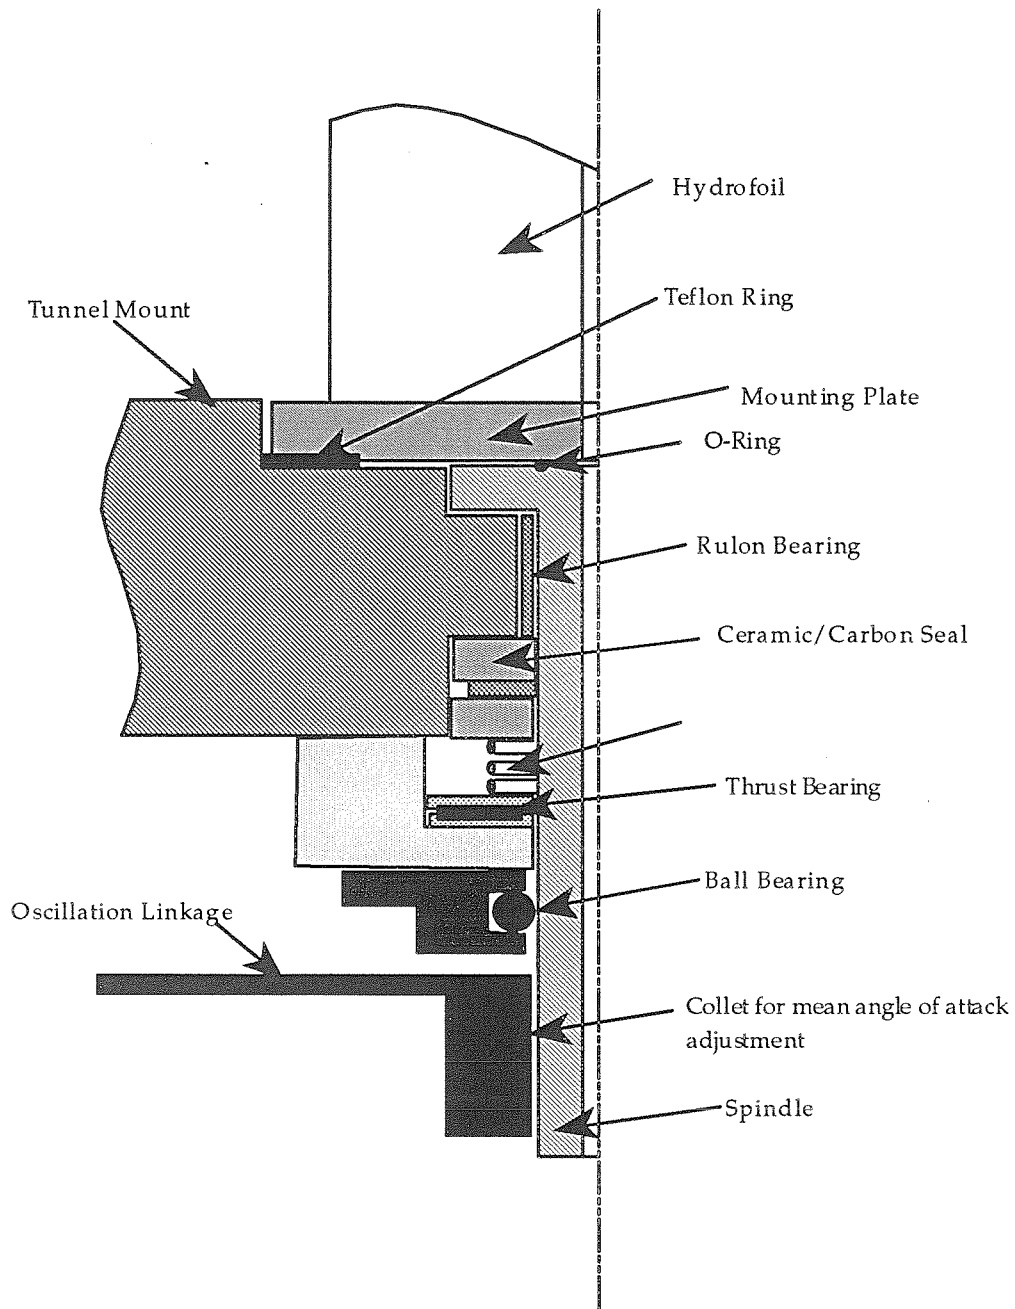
Detail of Hydrofoil Spindle Seal and Bearings
